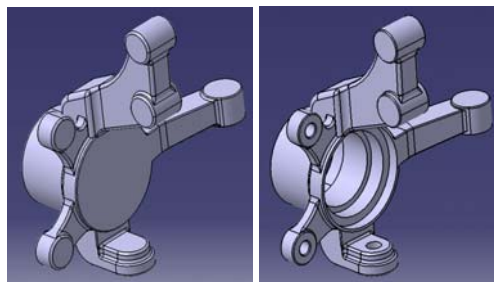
Manufacturing-oriented CAD modeling (knuckle)
